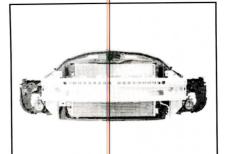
Showing the modular front end (MFE) assembly—Cooper Coupe
